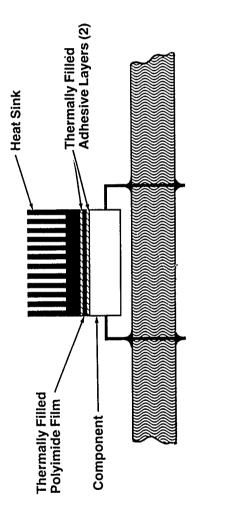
Heat Sink Mounted on Top of DIP Component.
